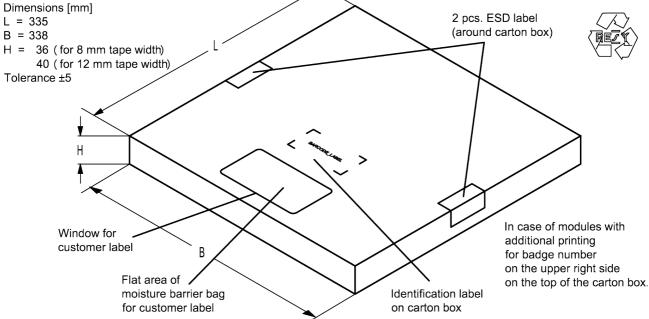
Drawing of folding box for reel with diameter of 330 mm.
